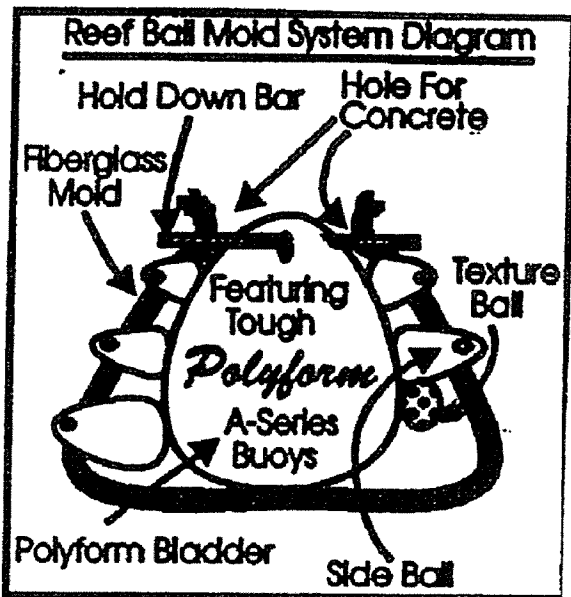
Figure E. Commercially constructed designed units, by Reef Innovations, currently exist on site and are proposed for future reef materials. "Pallet or Reef Balls" are made by pouring concrete into a fiberglass mold containing a central Polyform buoy surrounded by various sized inflatable balls to make holes. Pallet balls units measure 3 to 5 feet in diameter.
